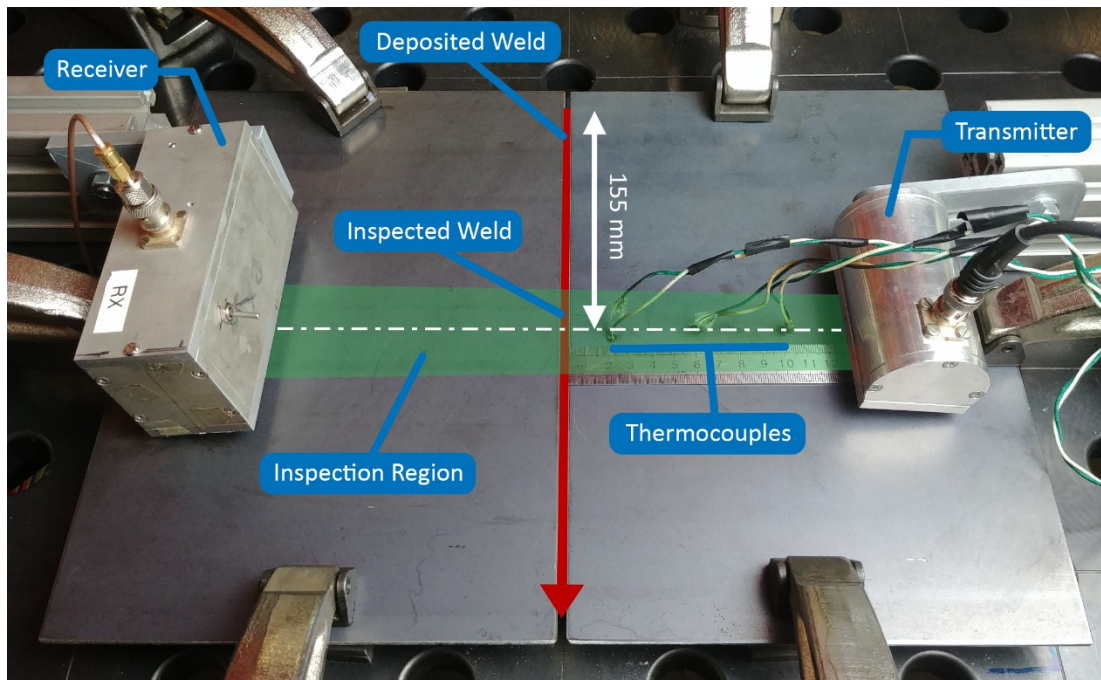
In-process non-contact ultrasonic inspection set-up; the transmitting and receiving transducers are located on either side of the weld interface with the inspection region shown between the dashed lines.
